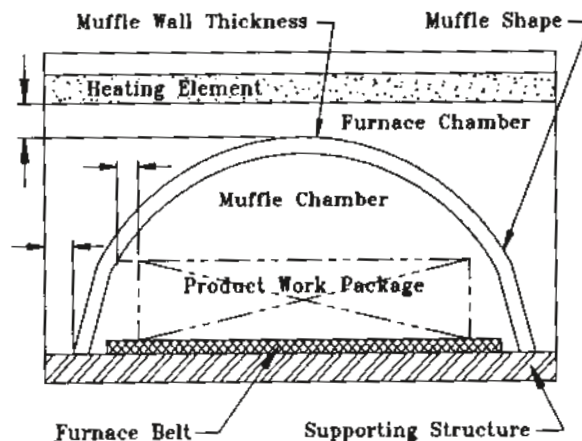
Product Work Package for a continuous belt furnace with muffle
